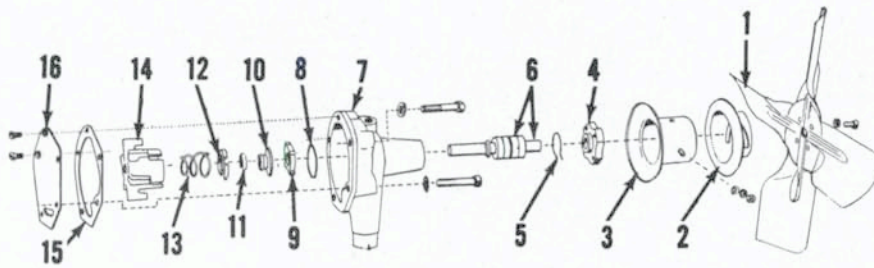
Exploded view of D-14 and D-15 non-diesel water pump and fan assembly.
